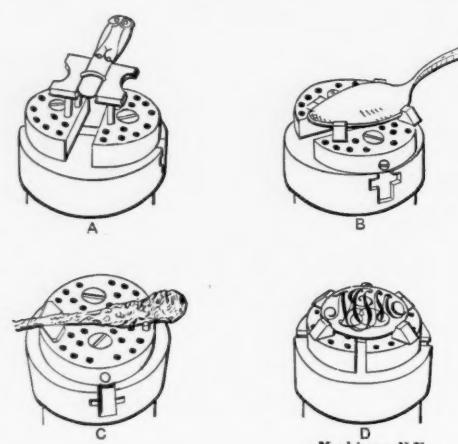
The Way in which Irregularly Shaped Pieces are held by the Auxiliary Attachments
